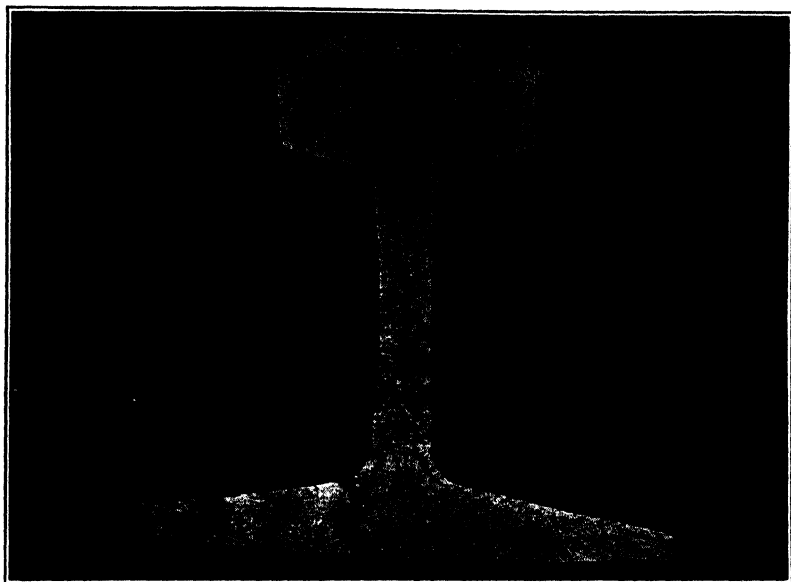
PHOTOGRAPH OF FRACTURED SURFACE OF RAIL, AFTER HAVING BEEN RUPTURED IN THE TESTING-MACHINE.
